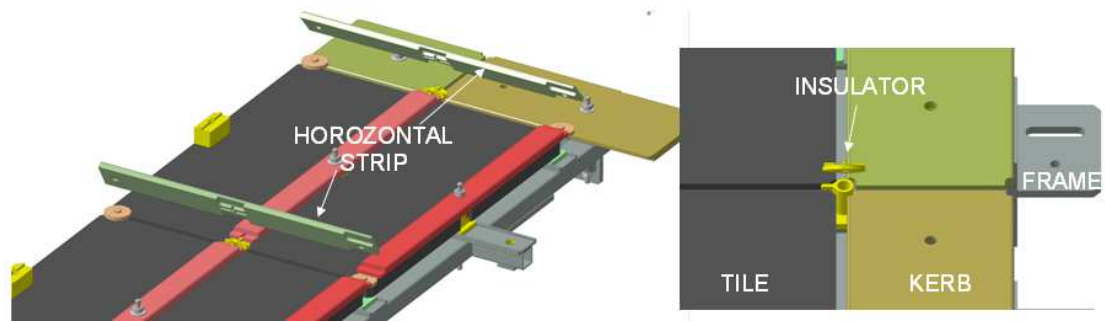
Horizontal (left) and kerb (right) assembly.
